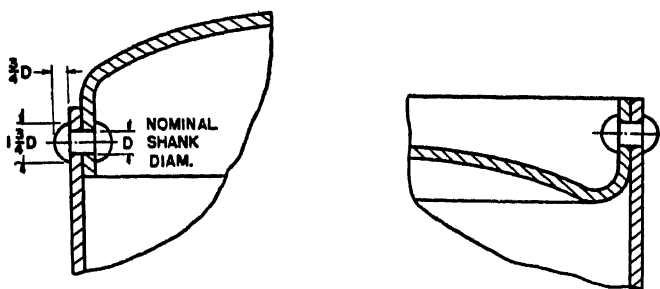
Pressure Head Attachment for Non-ferrous Vessels.
